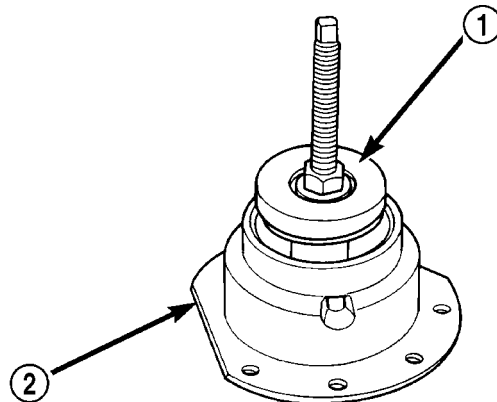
Position Bearing Cup Remover Tool in Retainer
